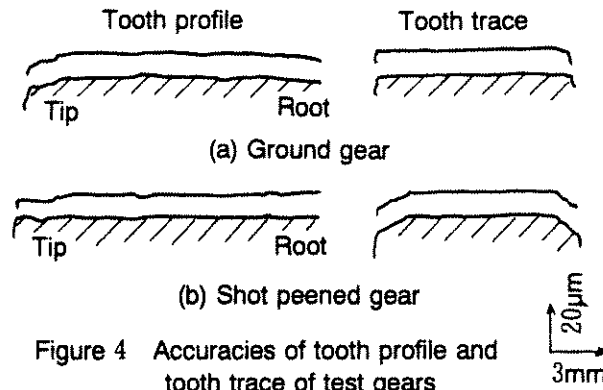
Accuracies of tooth profile and tooth trace of test gears
